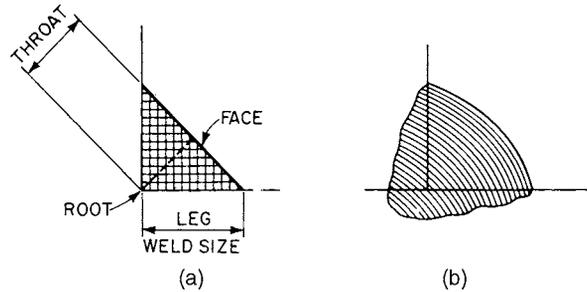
Fillet weld. (a) Theoretical cross section. (b) Actual cross section.
